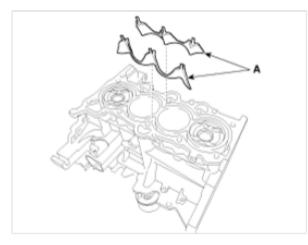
Identifying Water Jacket Insert Courtesy of HYUNDAI MOTOR AMERICA
